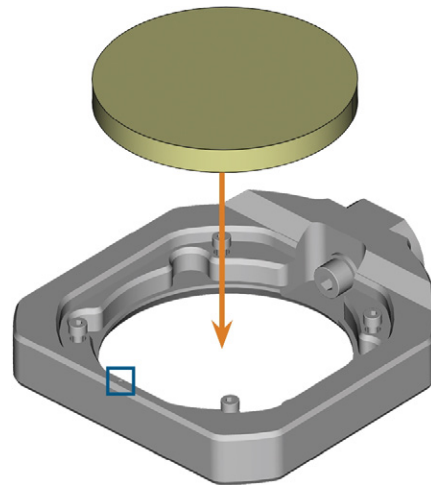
INSERTING A DISC INTO THE BLANK HOLDER (POSITION FOR SAFE REMOUNTING MARKED BLUE)
